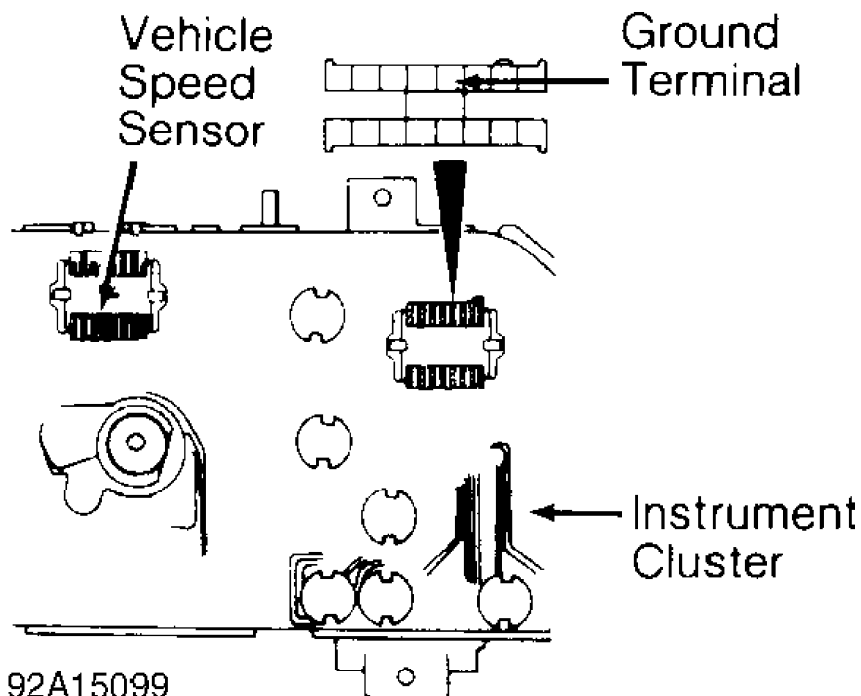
Checking VSS (Colt Vista AWD, Expo AWD & Summit Wagon AWD)
